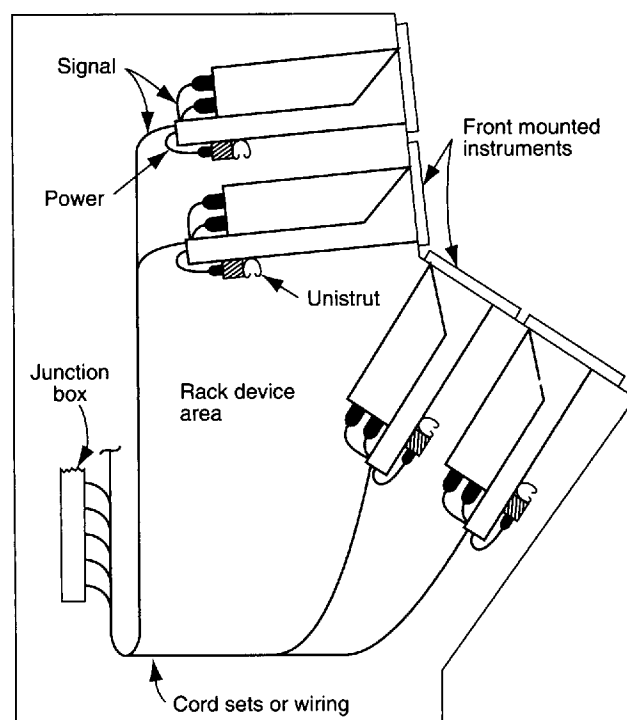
Panelboard Wiring Terminating Field Wiring at Panel-Mounted Junction Box
